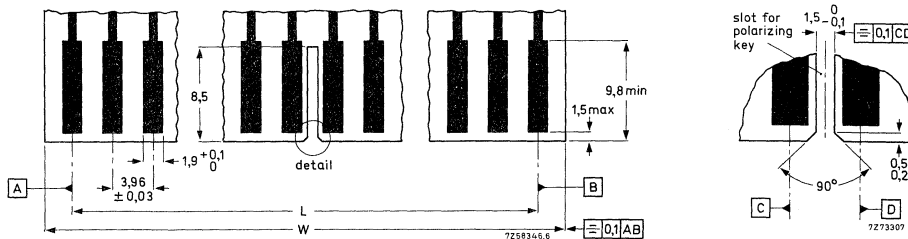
Recommended dimensions of the printed-wiring board; see Table 4 for dimensions L and W.
